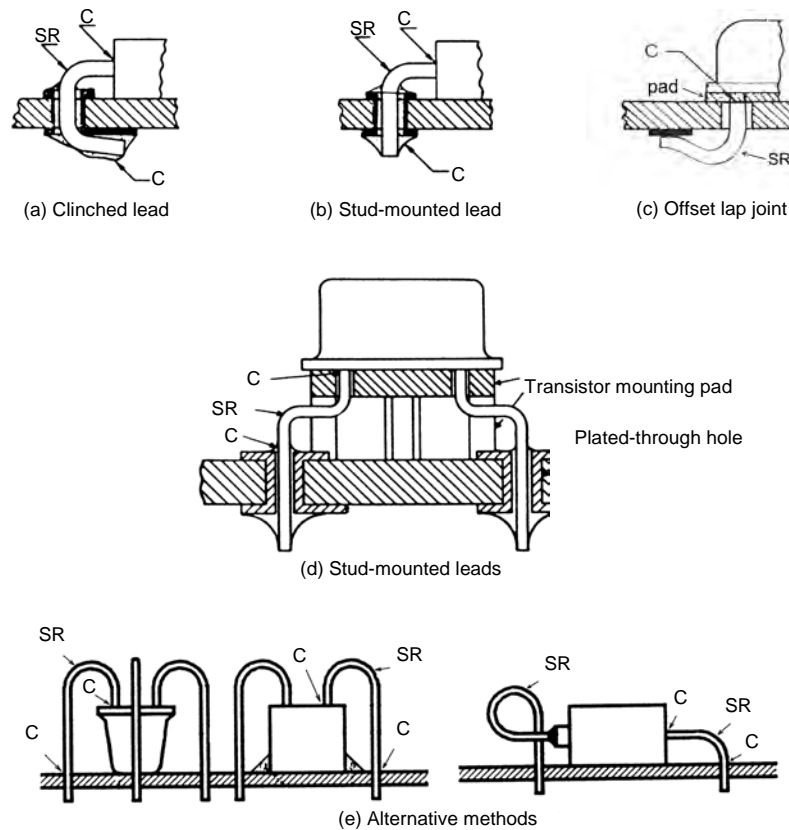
Assembly of TO-39, TO-56 and CKR06
